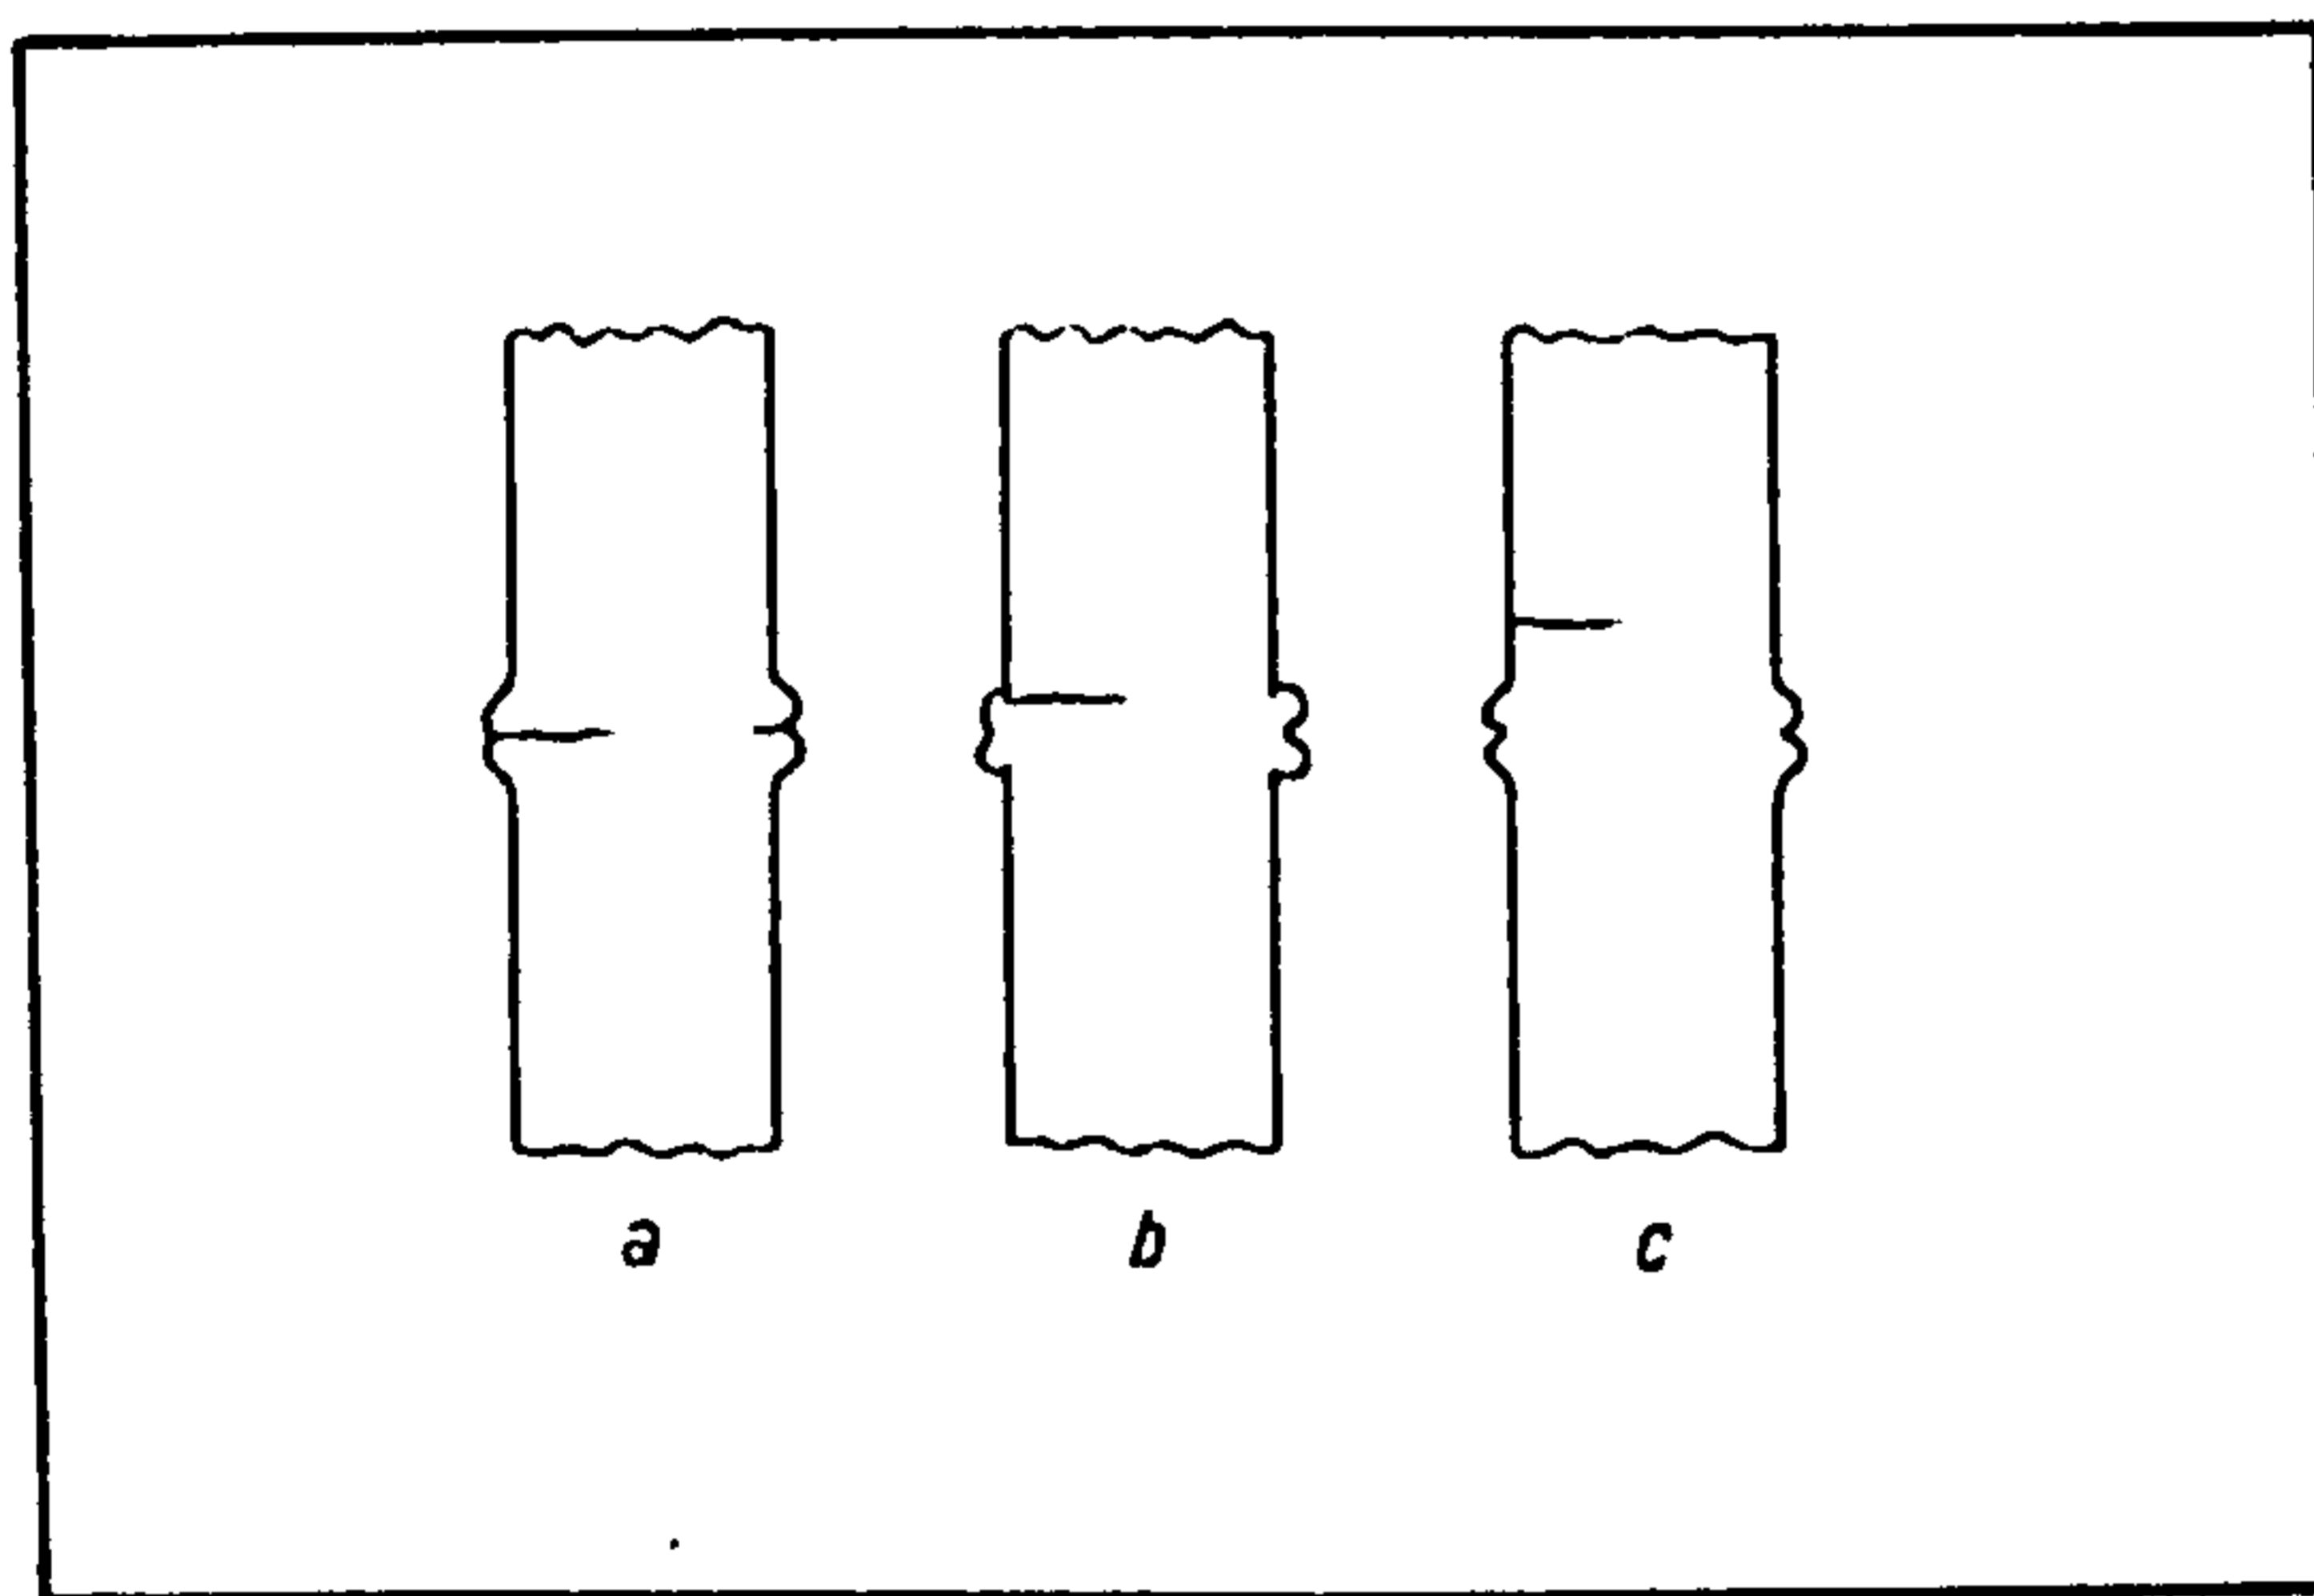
Creep rupture cracks in pressure butt welds with heated tool; (a) cracks on the welding surface, (b) crack starting from notch and (c) crack in the base material.
